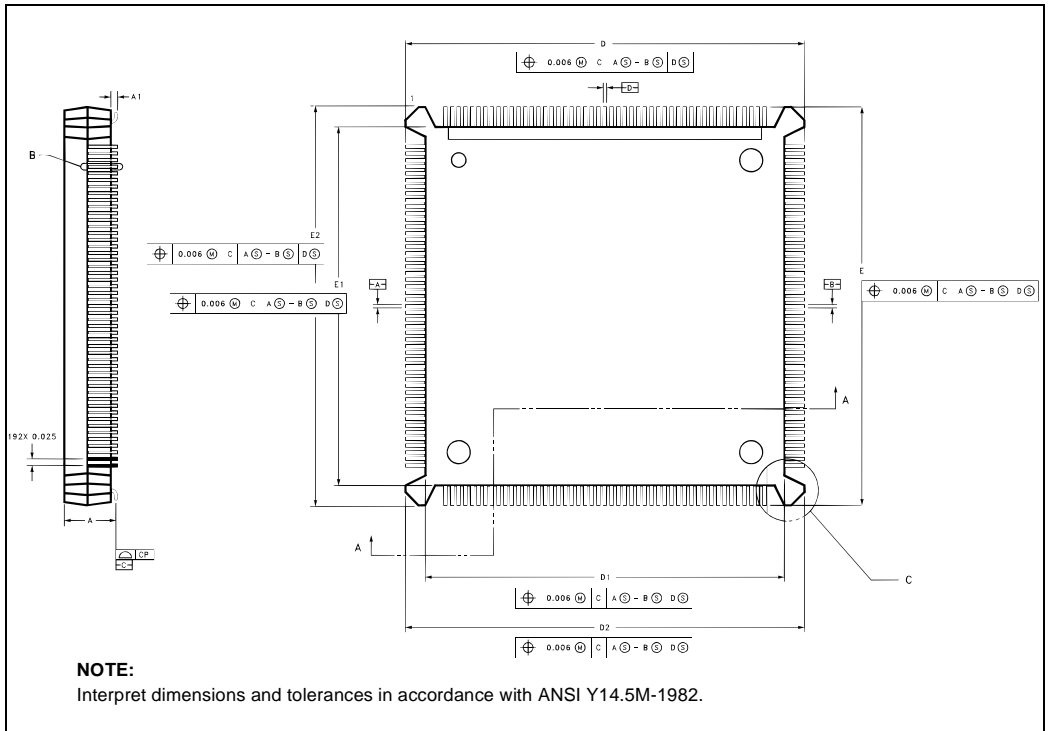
Principal Dimensions and Data for 196-Lead Plastic Quad Flat Pack Package
